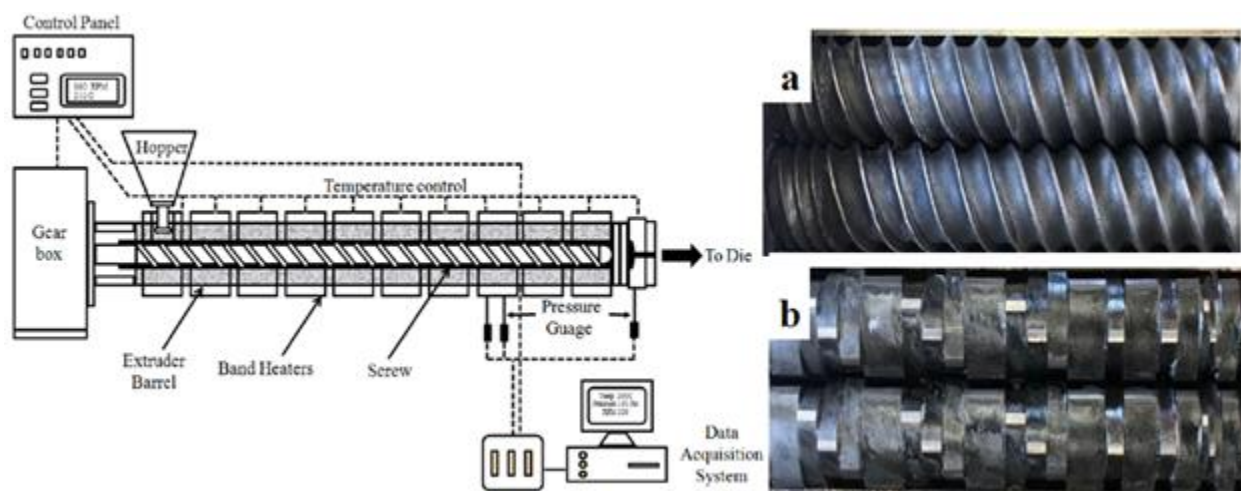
Typical extrusion process and (a) conveying element (b) kneading element
